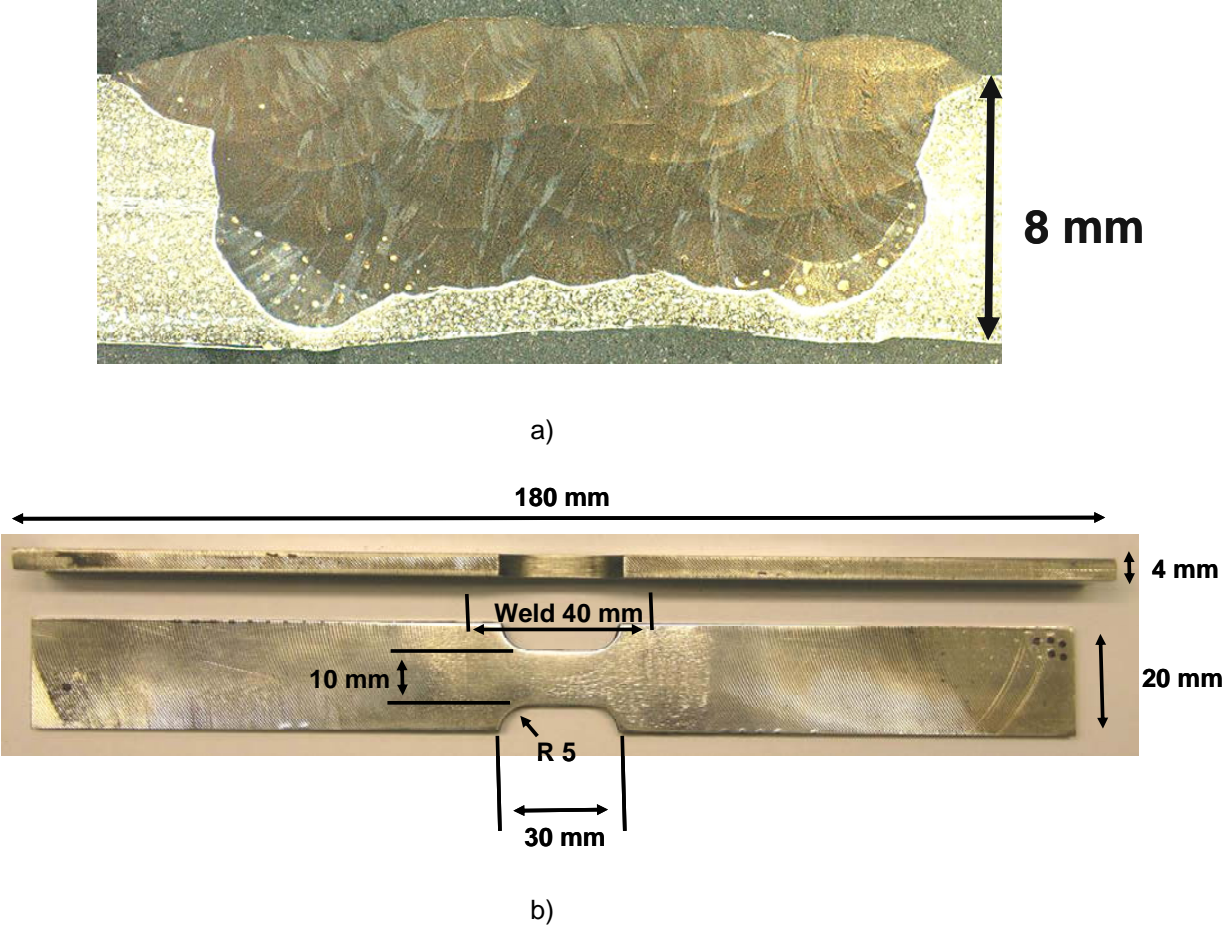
a) Cross-section of the weld, before machining of the tensile specimens. b) As-finished tensile specimen geometry.
